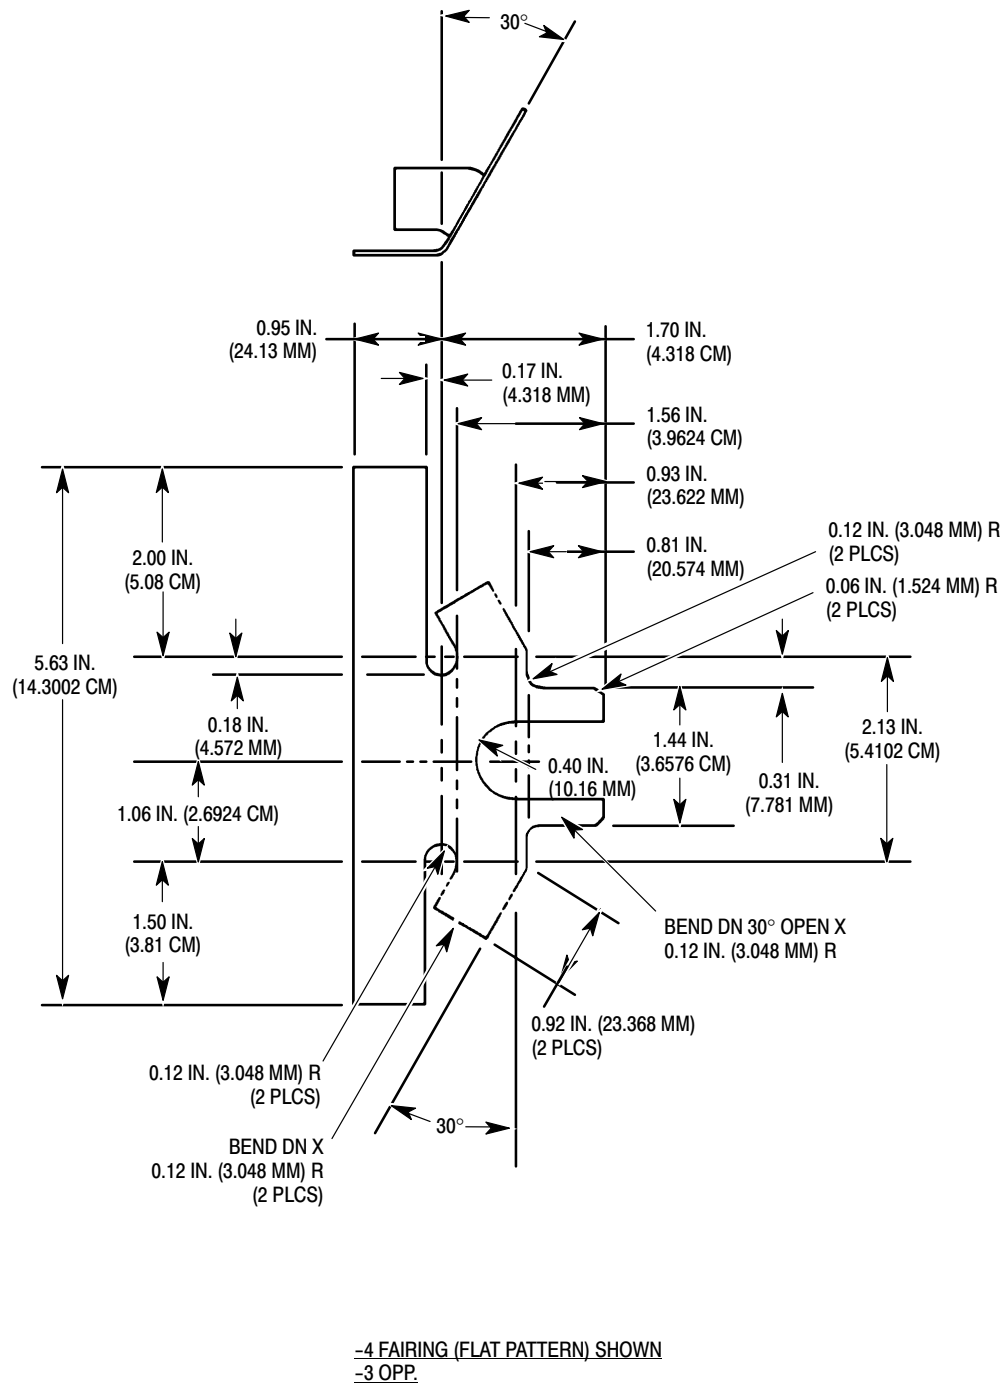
Auxiliary Fairings and Seals Installation (Sheet 2 of 2)
